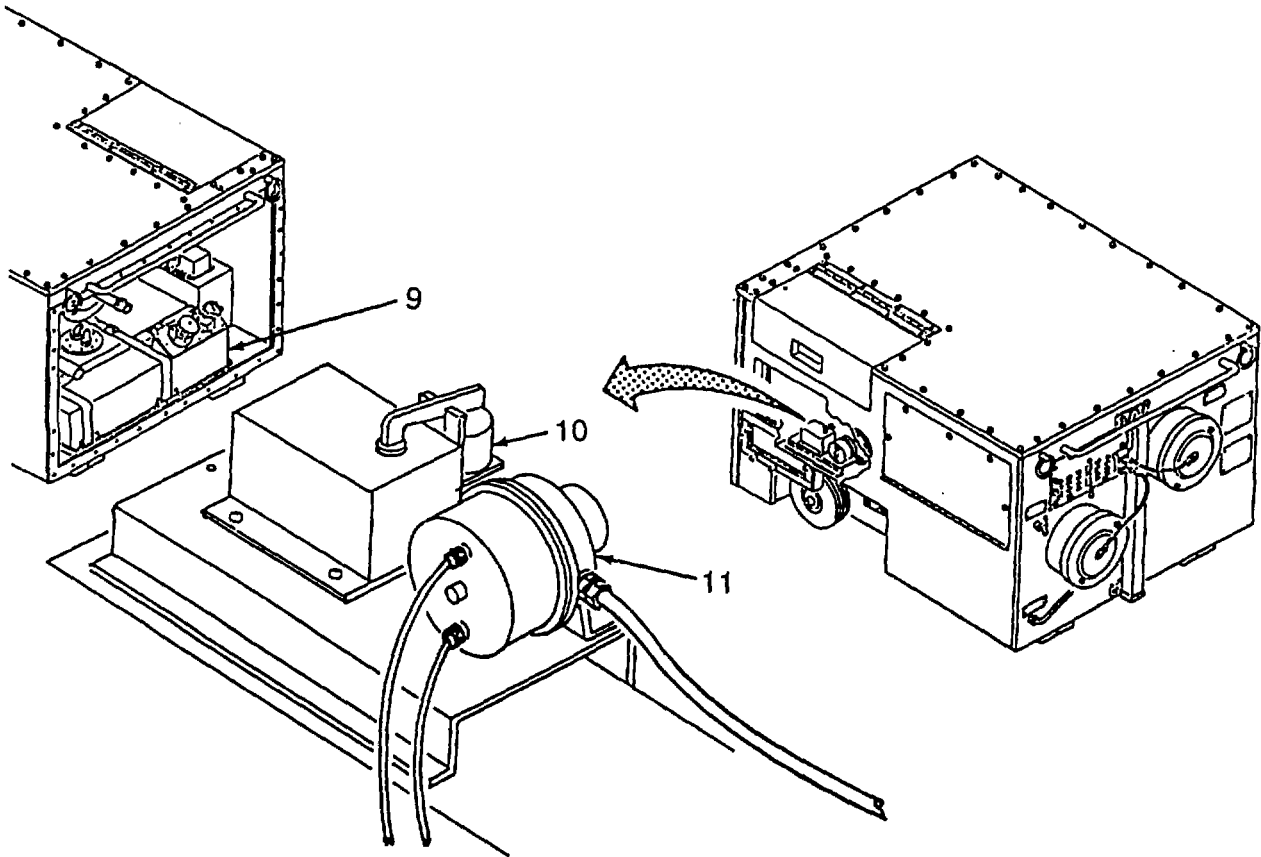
Heater Interior (Sheet 3 of 3)
